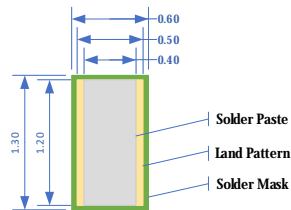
Board Land Pattern on Host PCB (Top View Seen on Host PCB)
